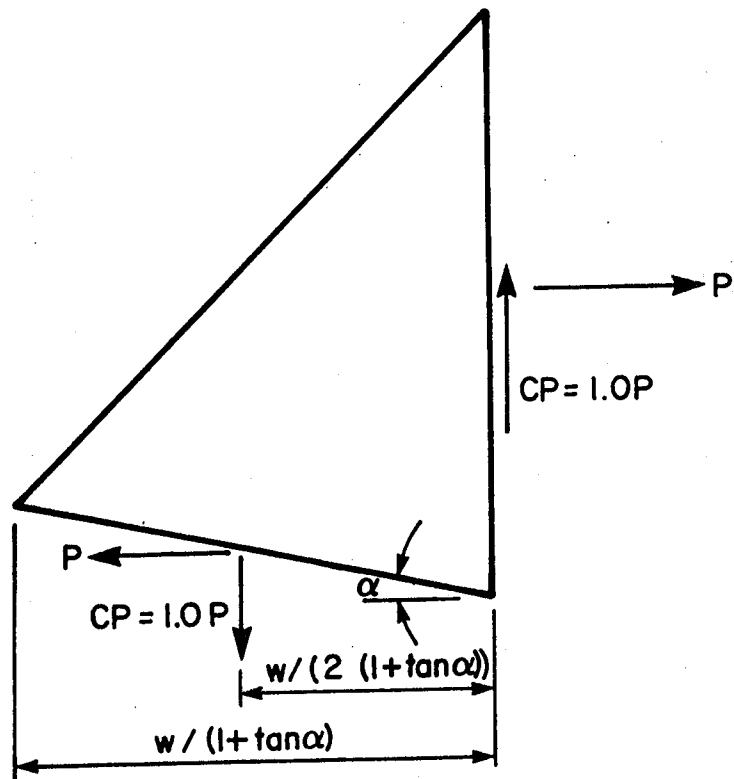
Equilibrium Of Fillet Weld With  $C=1.0$
